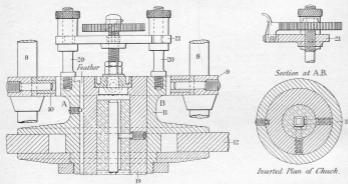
The Benton-Waldo machine; detail of sliding head and chuck. Half size.
